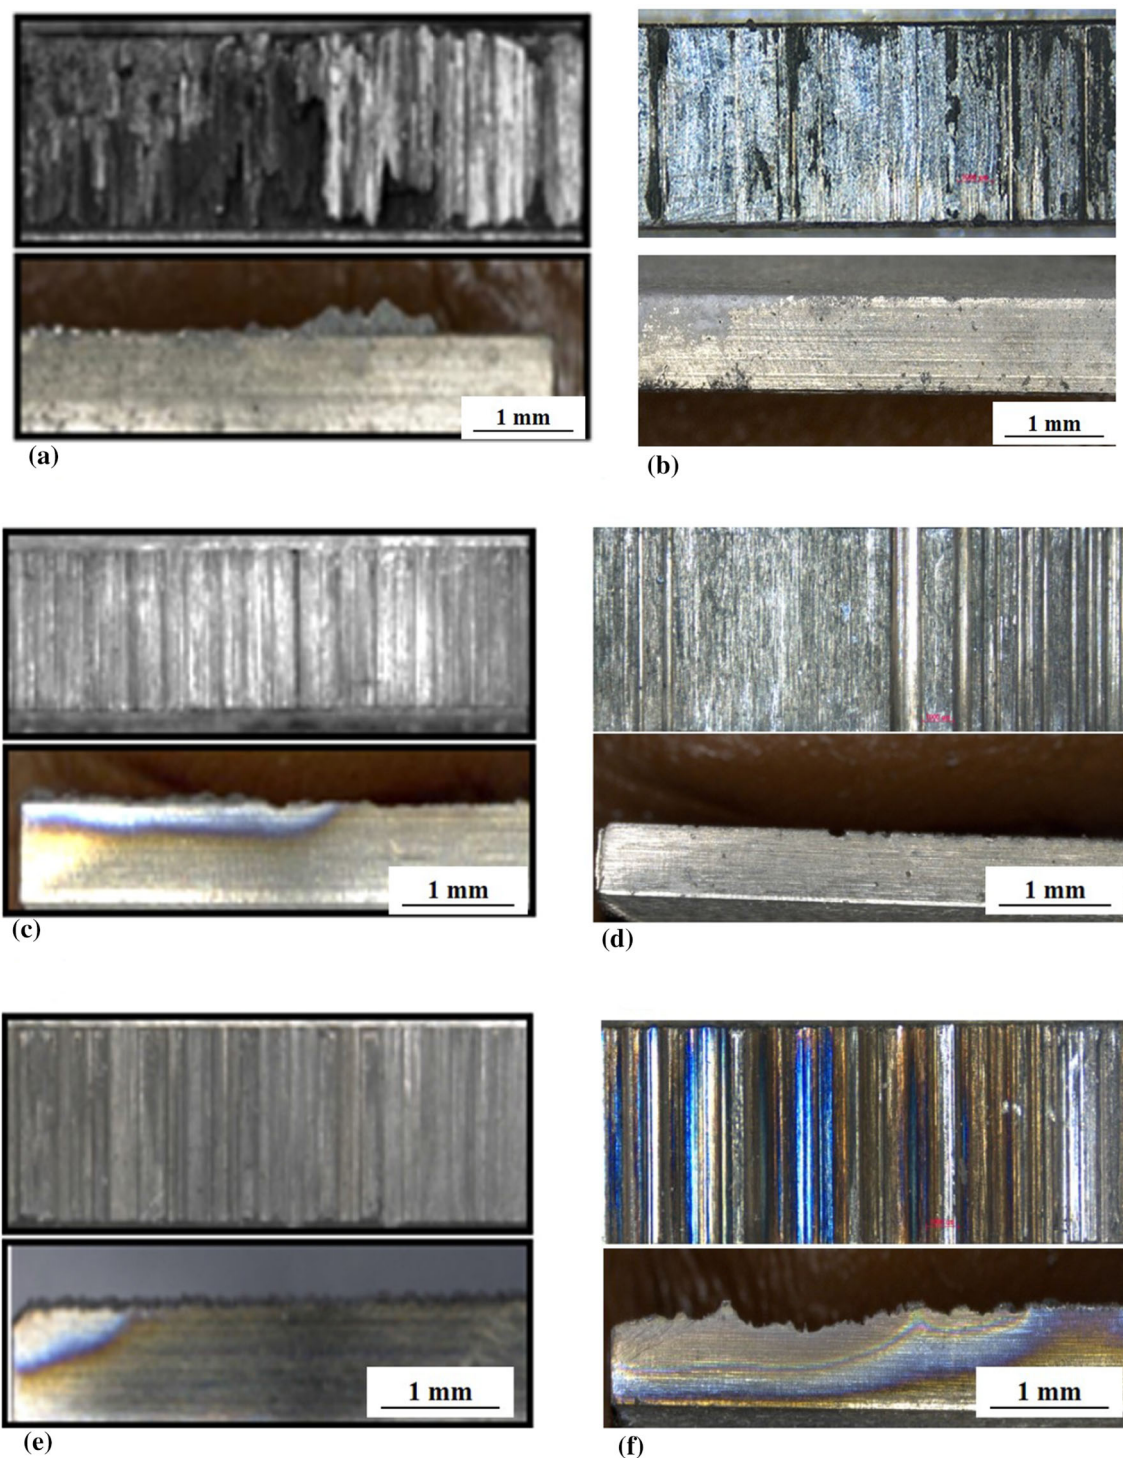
Surface and cross-section morphologies of the blade tip rubbed against as-sprayed (a) and corroded coatings (b) from Test 1, as-sprayed (c) and corroded coatings (d) from Test 2, and as-sprayed (e) and corroded coatings (f) from Test 3
